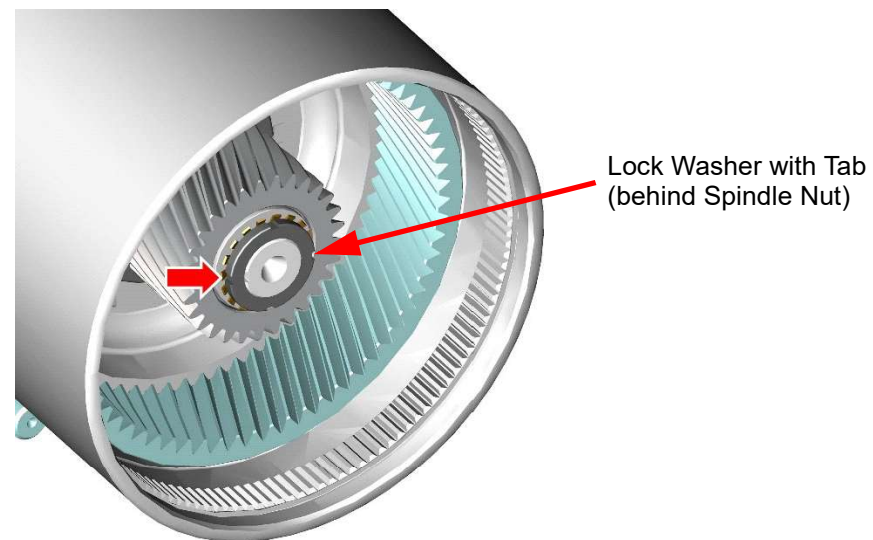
Bending a Tab on the Spindle Nut Lock Washer
